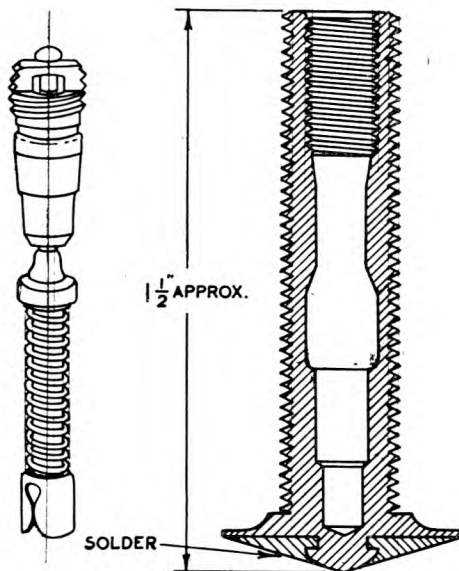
SCHRADER VALVE CORE AND STEM.
